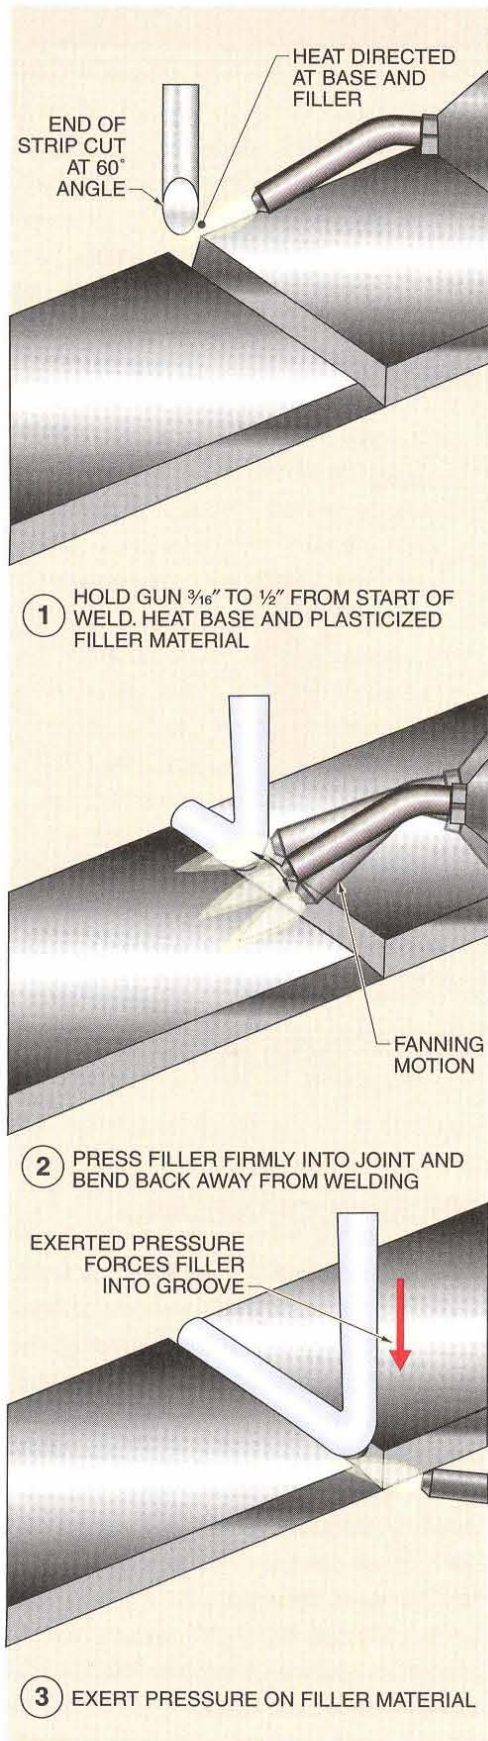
When the base material and the filler material become tacky, press the filler firmly into the joint, continuing to heat the area and exert pressure as the welding progresses.
